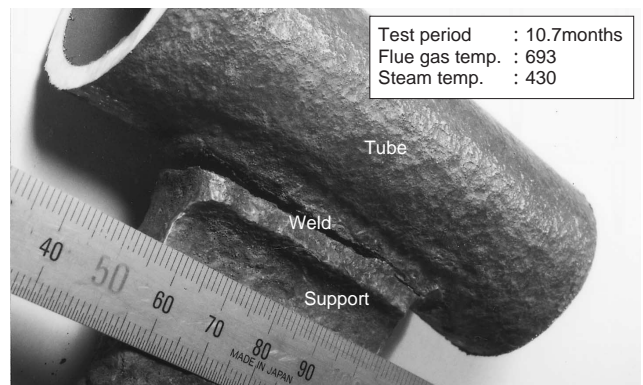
General appearance of the welded joint corroded severely.
